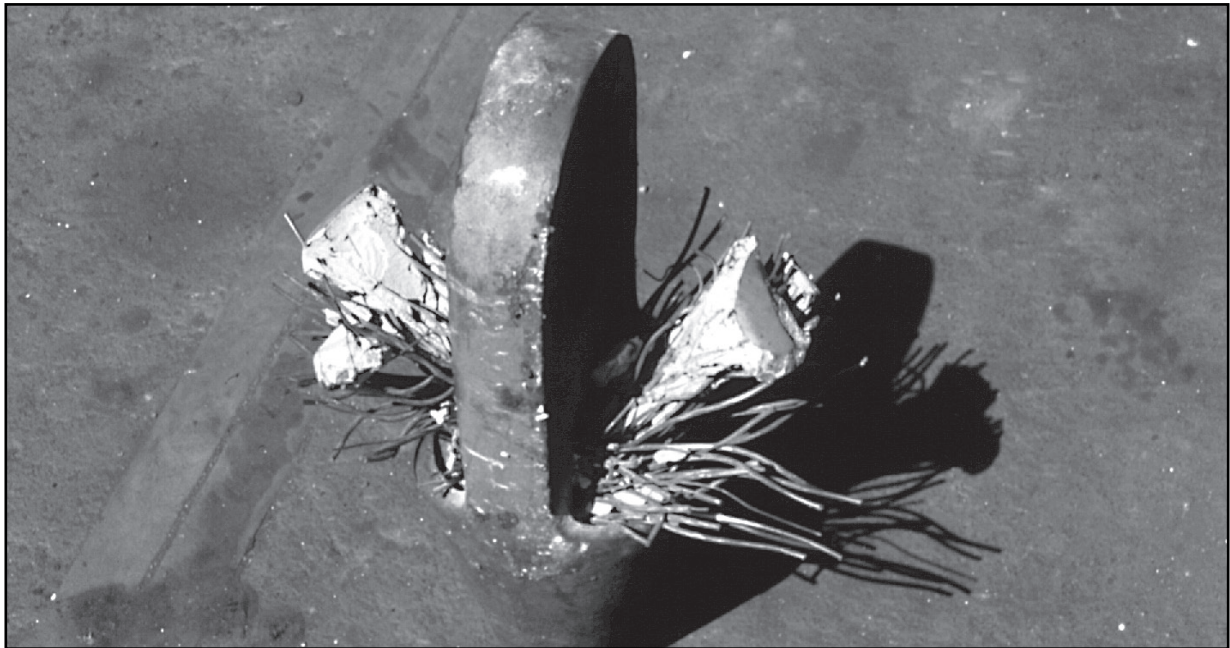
Resin spelter socket pushed out of its socket mechanically
